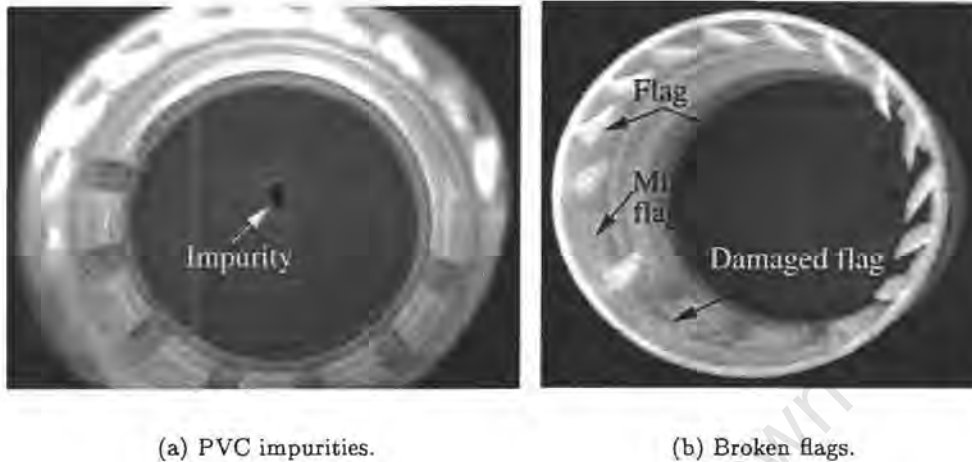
Two possible closure defects which will not be examined in this thesis.
